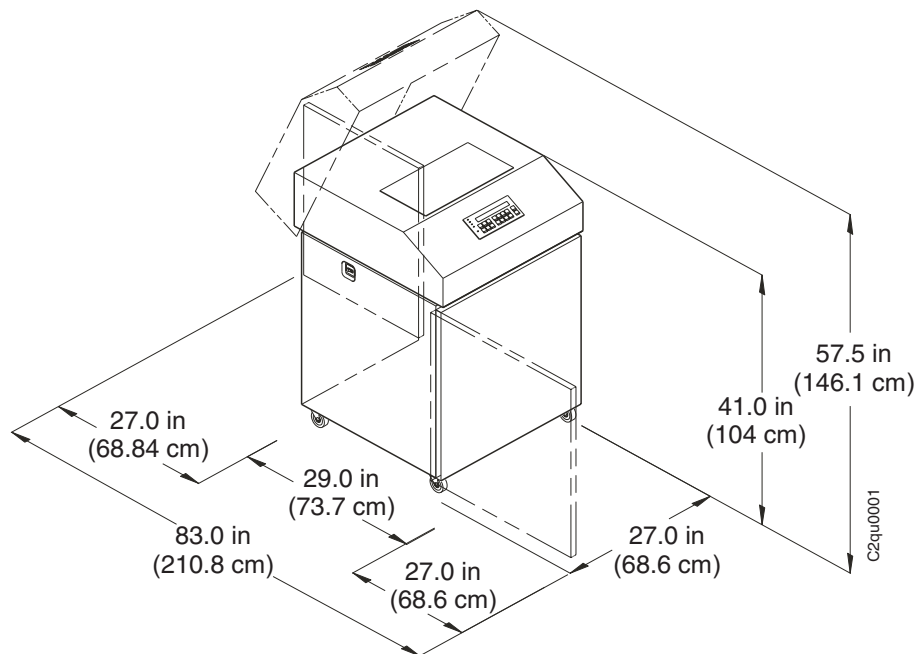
Exploded View of Cabinet Model Printer Dimensions
